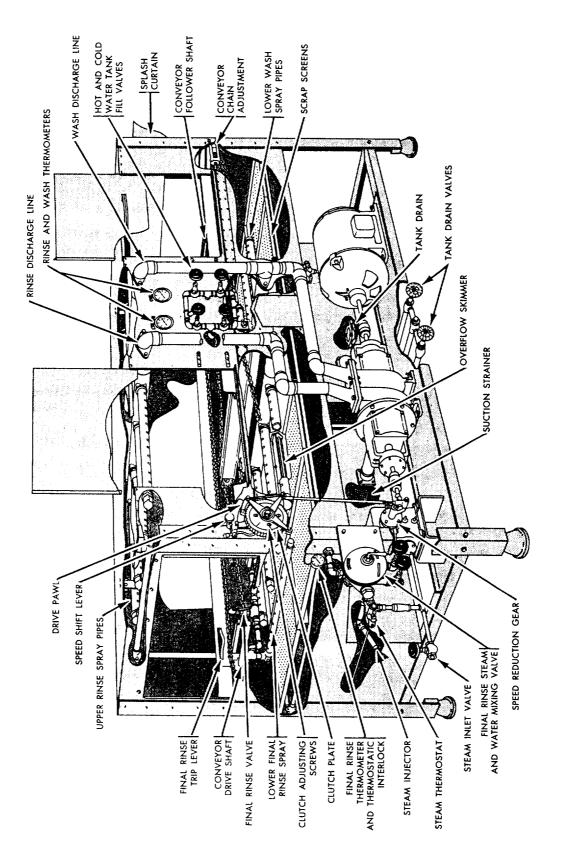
Typical semiautomatic single-tank dishwashing machine.
